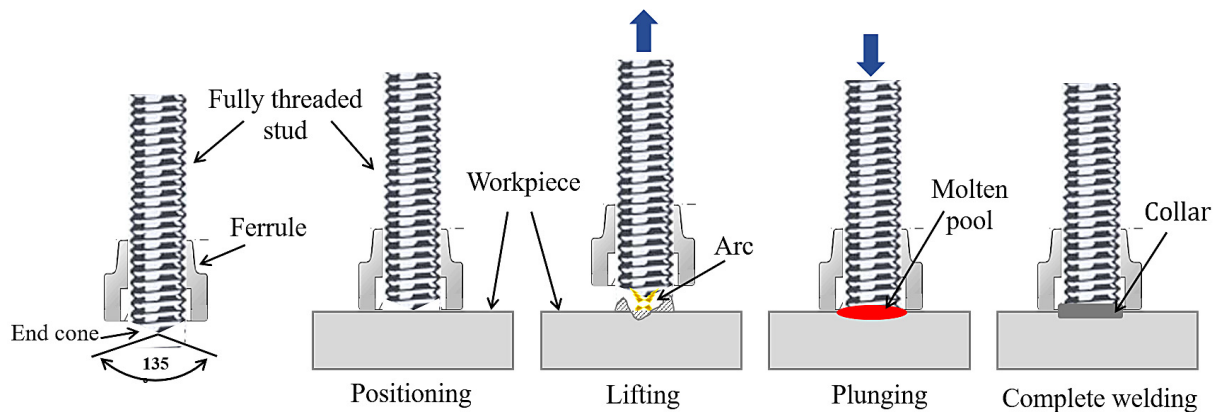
Schematic of drawn arc stud welding process with ceramic ferrule, including positioning, lifting, plunging and complete welding
